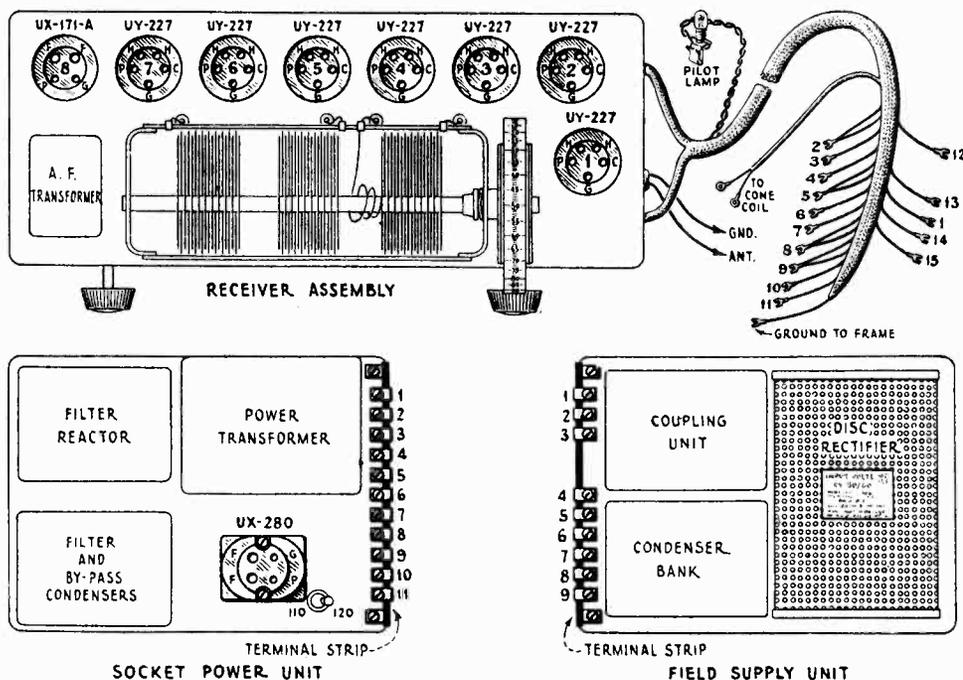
Radiotron socket contacts, location of parts, connection lugs and terminal strips of the socket power and field supply units
